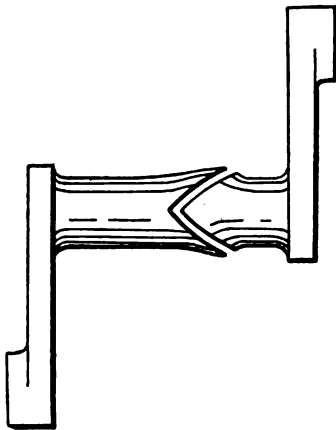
WELDING A FRACTURED ROCKER SHAFT.
